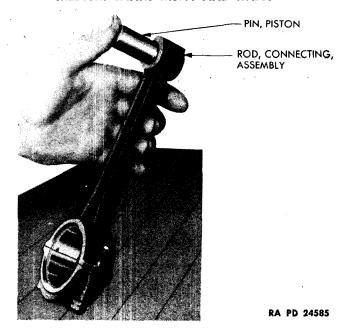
Fitting Piston Pin In Connecting Rod, With Thumb Press Fit
